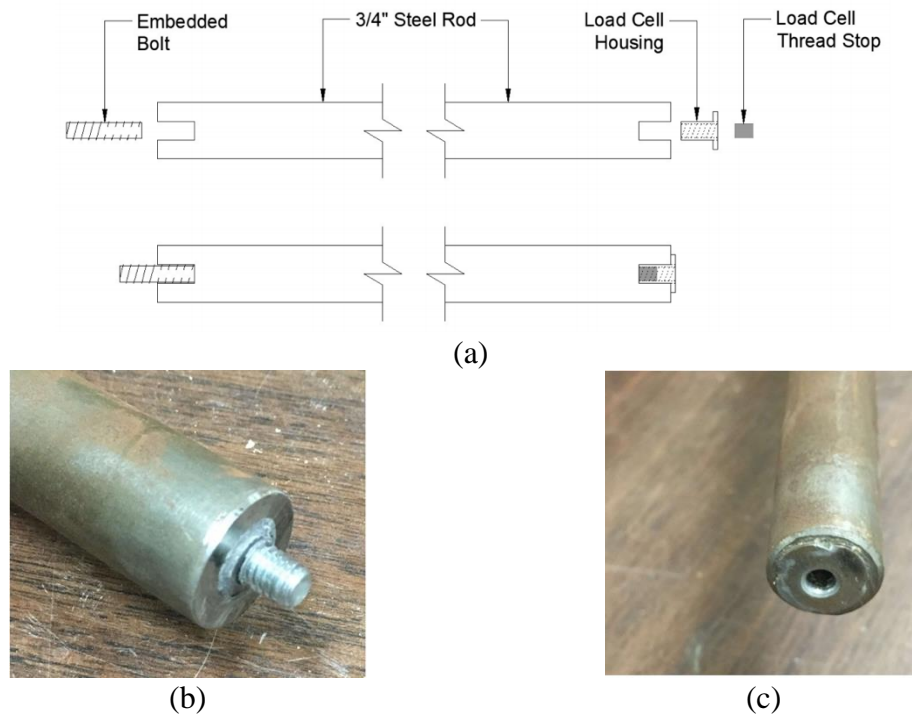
Loading rod assembly, (a) technical drawing, (b) connection to linear actuator system, and (c) load cell connection (Munson, 2018).
